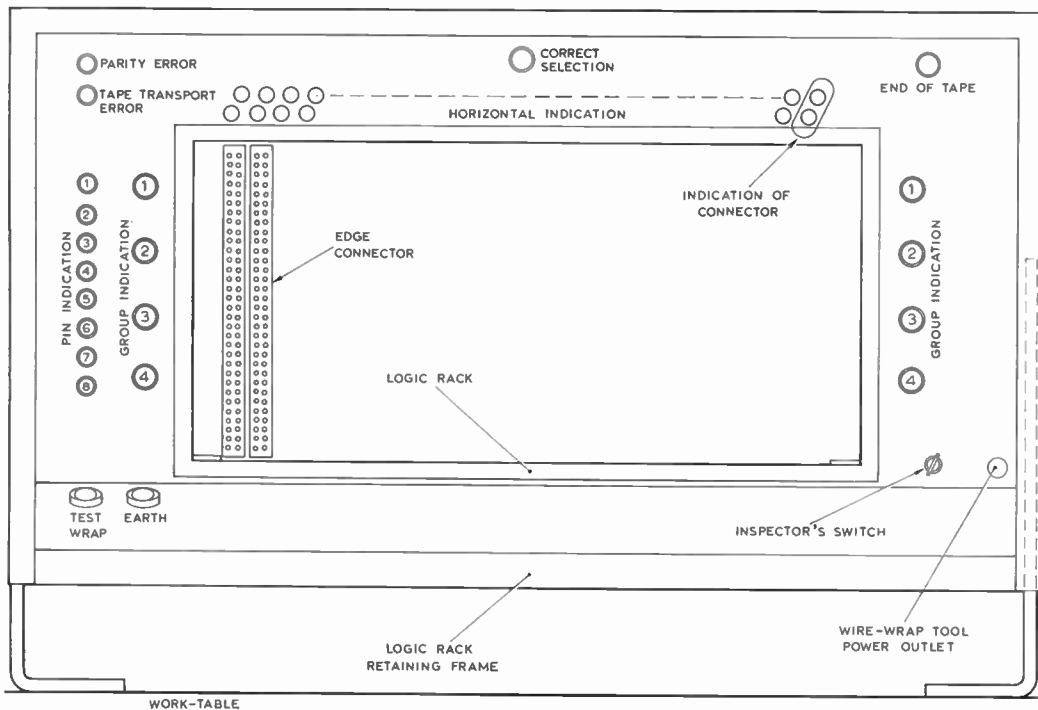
Semi-automatic backwiring machine. (Operator's view of the wiring panel.)
